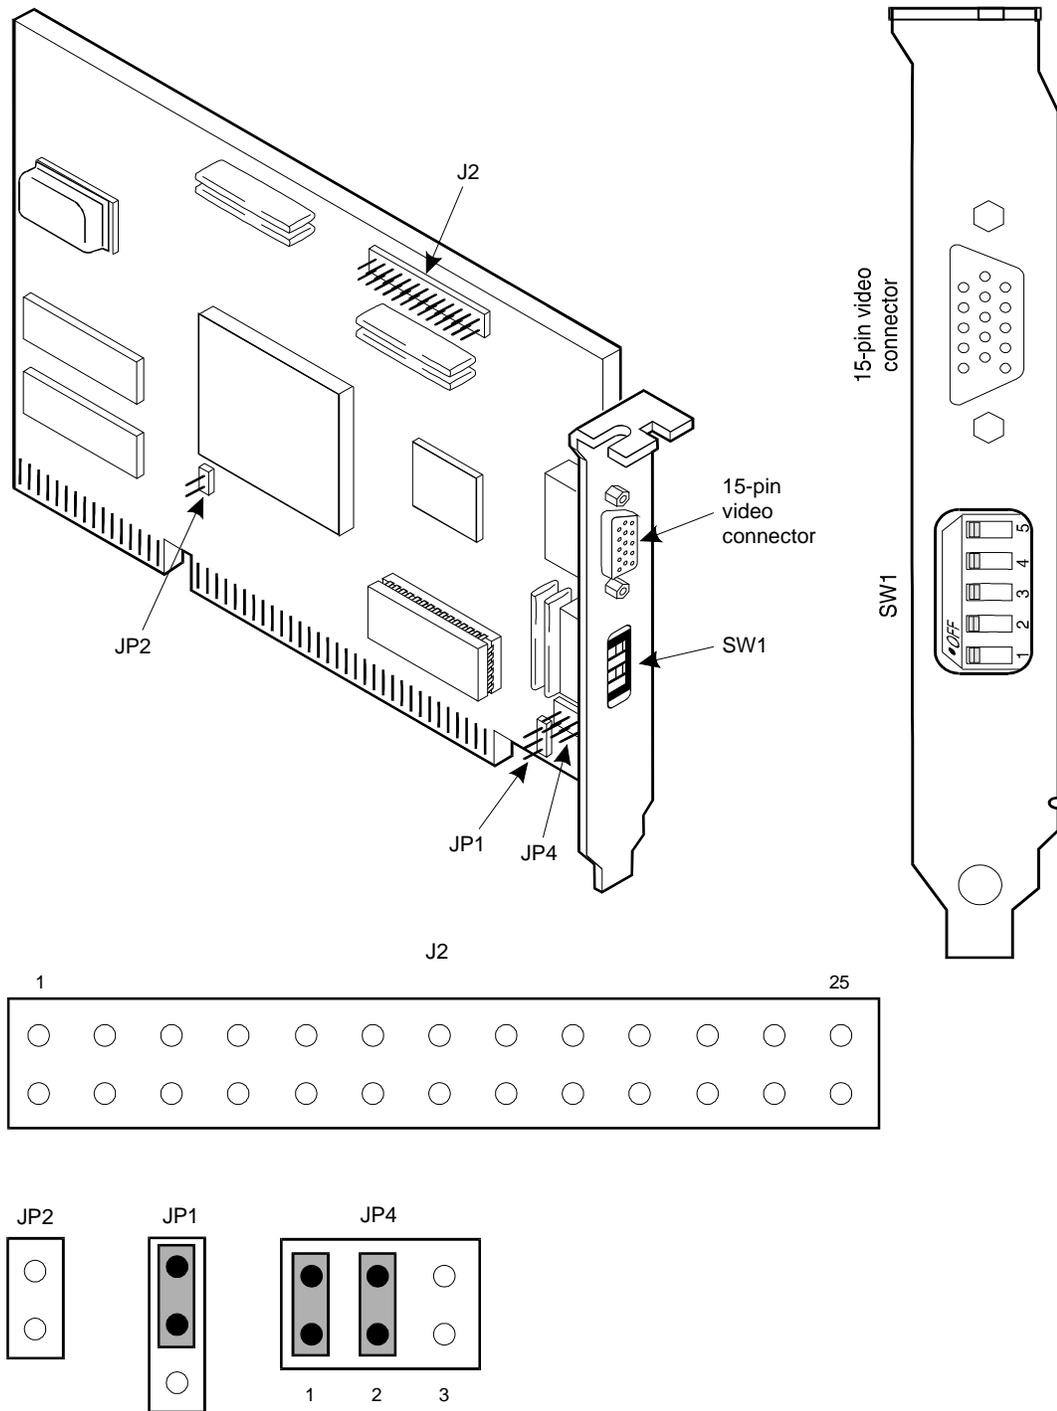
Video-Driver Card Switch Settings (Type 4)
